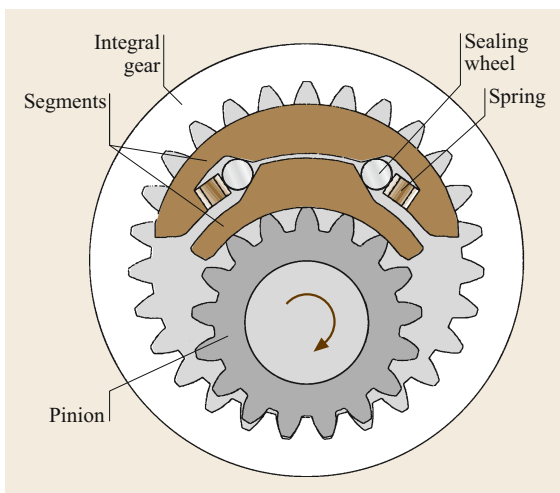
Internal gear pump with clearance compensation (after [17.16])
